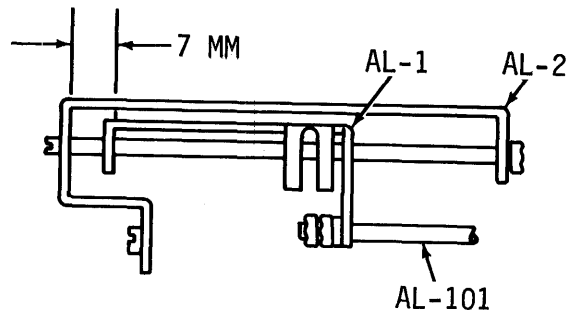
LOCATING DIMENSION FOR RIBBON FEED RACK
